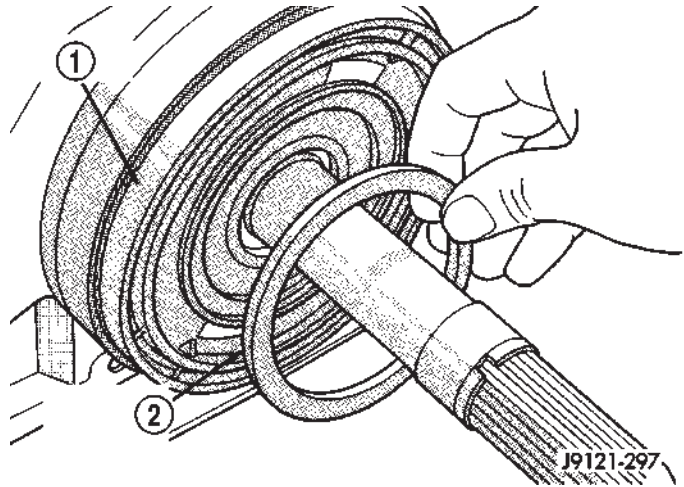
Overdrive Piston Thrust Plate Removal/Installation
